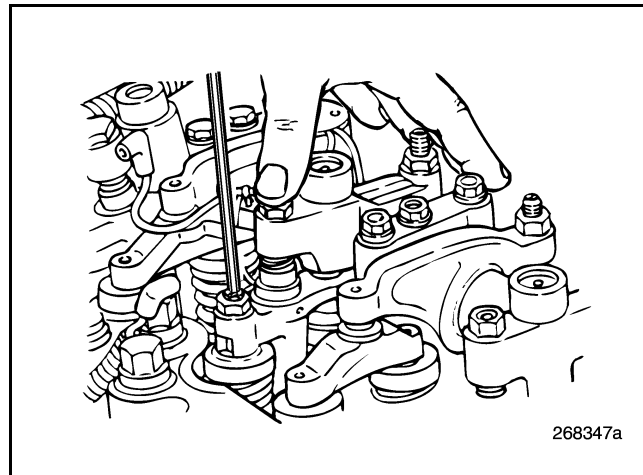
Turning the Exhaust Valve Yoke Adjusting Screw Until it Contacts Valve Stem
